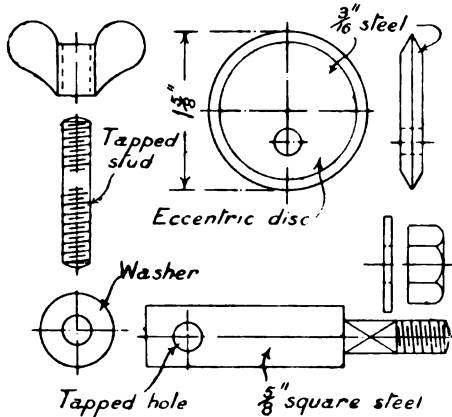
DETAILS OF DIVIDING ATTACHMENT. (Half full size.)
